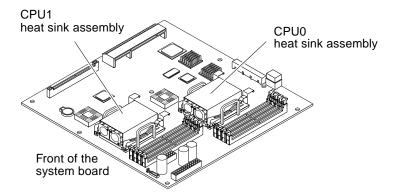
Location of the CPU Heat Sink Assemblies
